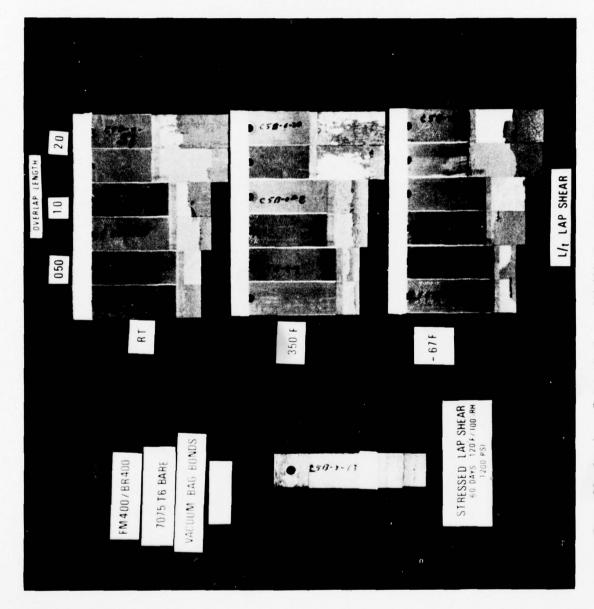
Specimen Failure Surfaces—FM 400, PasaJell 105, Vacuum Bag Bonds
